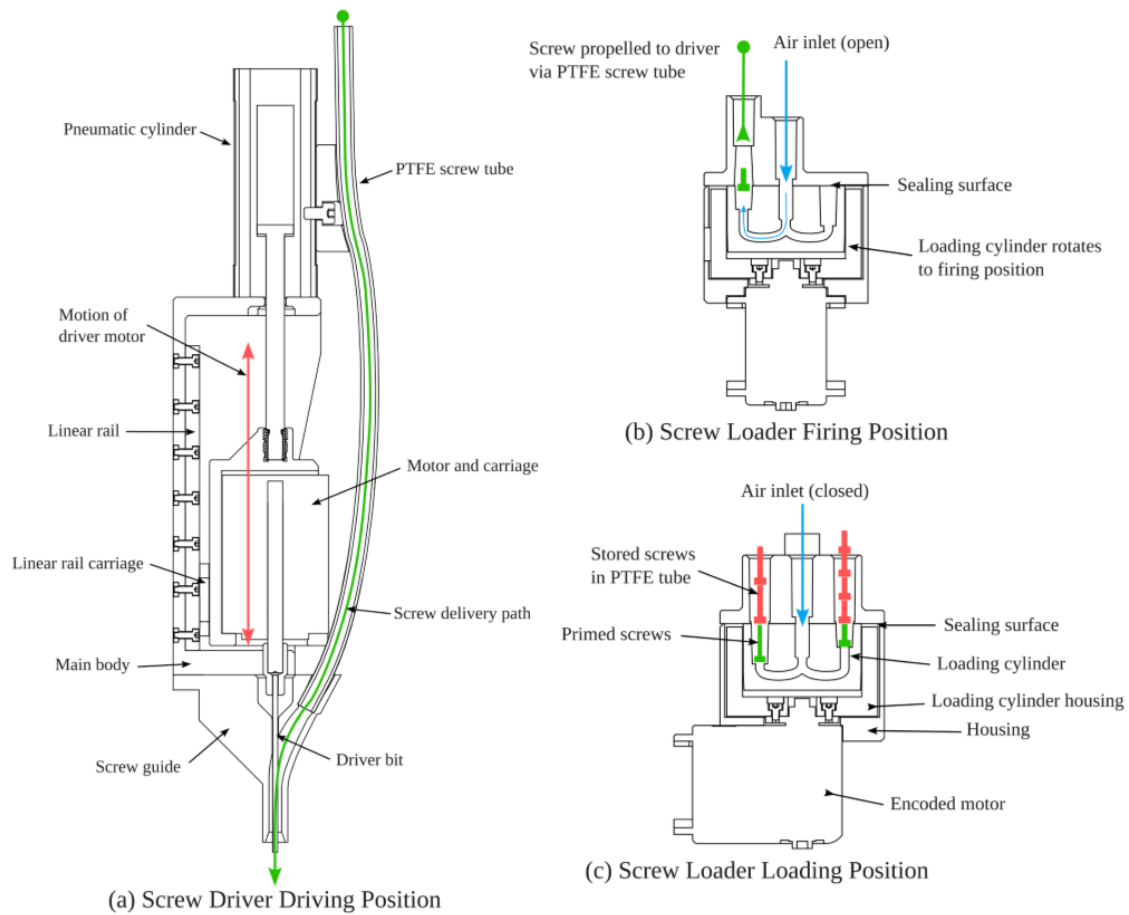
Cutaway diagrams of screwdriving system components illustrating a) the screwdriving tool-head in a lowered position, b) the screw loader in the firing position propelling a screw, c) the screw loader in the loading position with primed screws in the cylinder.
